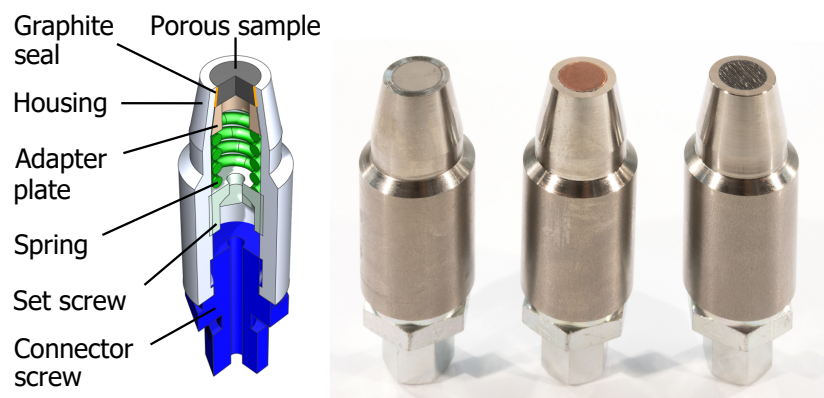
NISip sensor head with integrated porous samples; CAD and photo with ZrB_2 , Cu and C/C from left to right.
